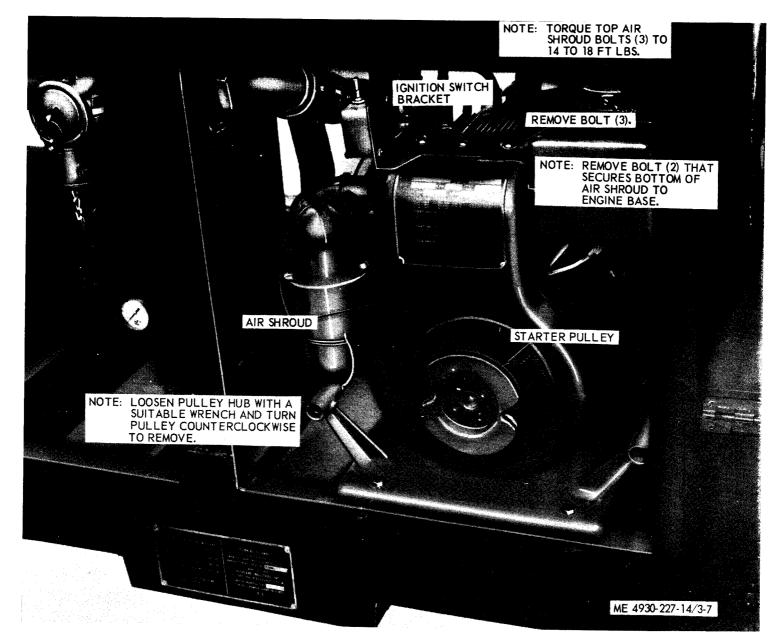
Starter pulley, air shroud, and ignition switch bracket, removal and installation.
